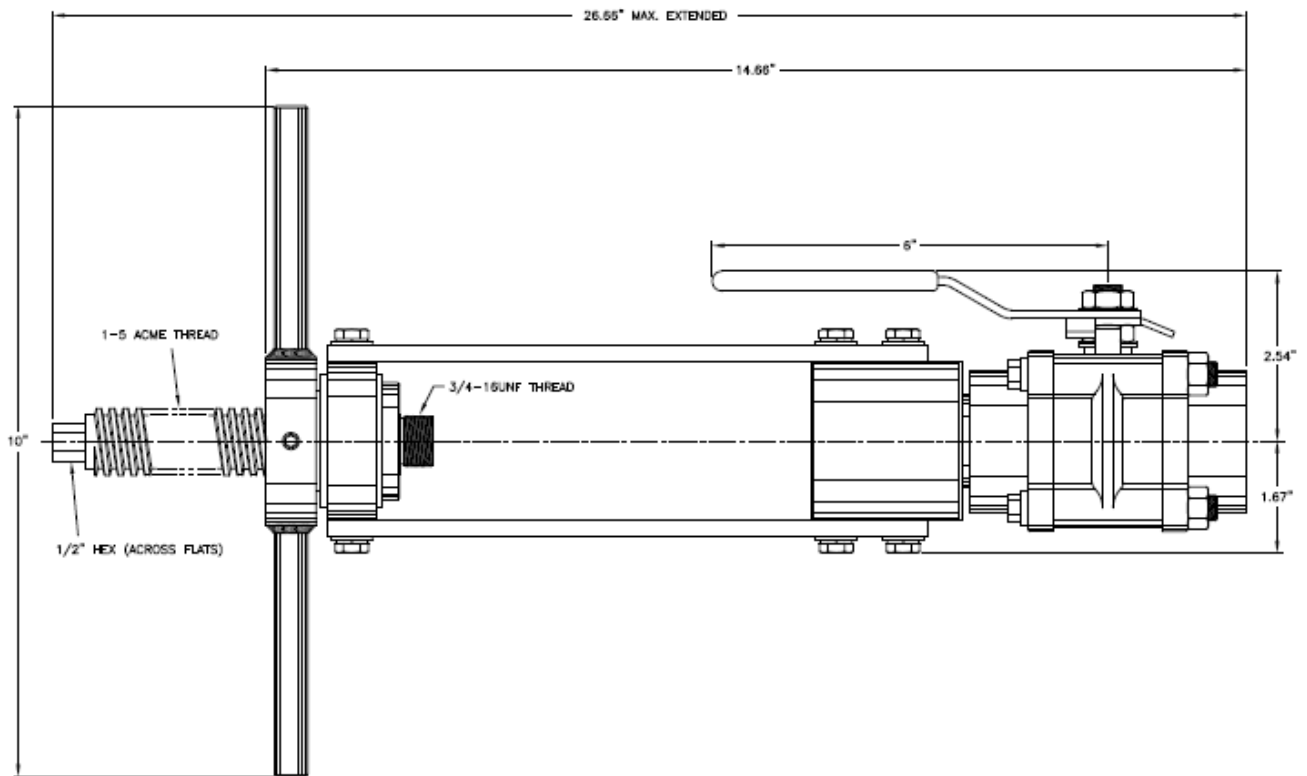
7642 Transducer Extraction Tool (uninstalled)
